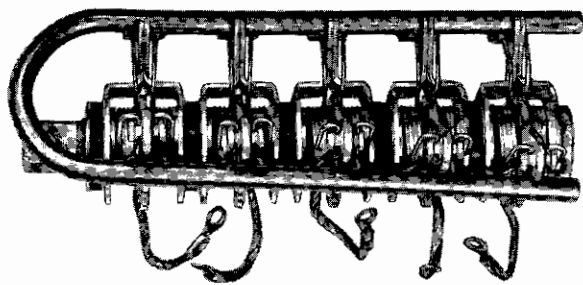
Lever And Shaft Assembly U-Shaped Tool
